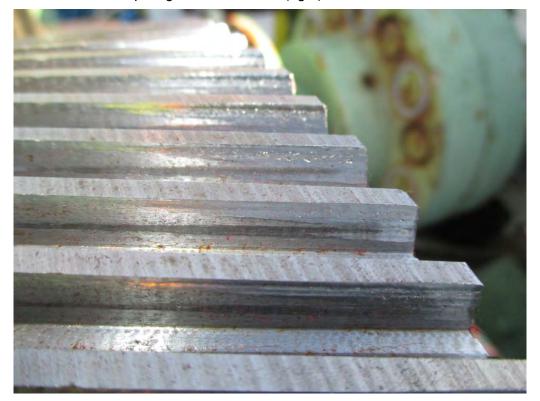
South Primary Reducer. View of west first reduction gear set, opening face of gear teeth. Closeup view of photo 16.
